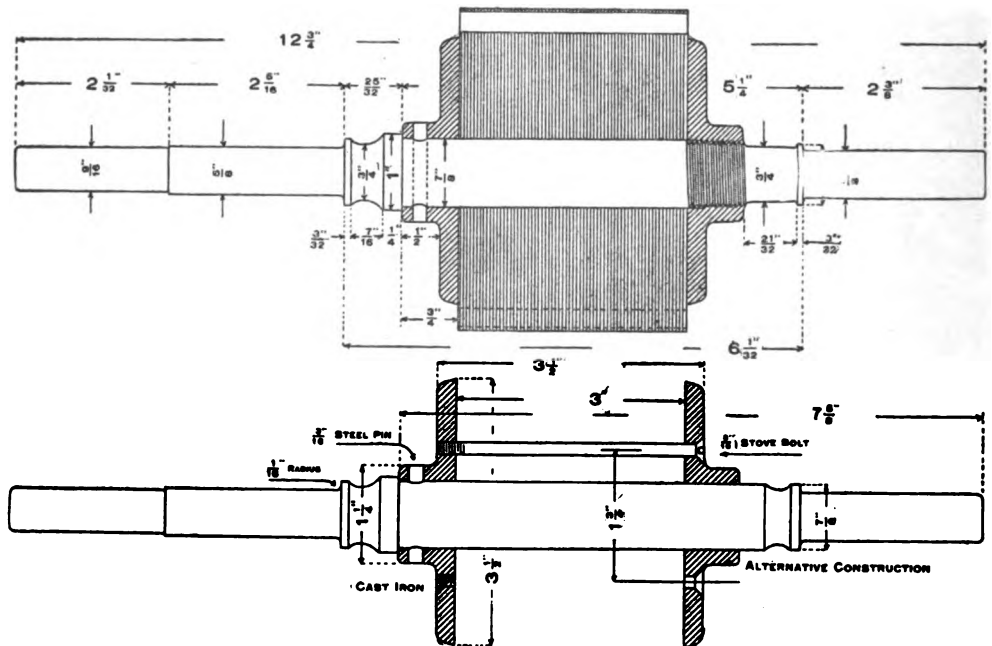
CONSTRUCTIONAL DETAILS OF SHAFT AND ROTOR CORE
